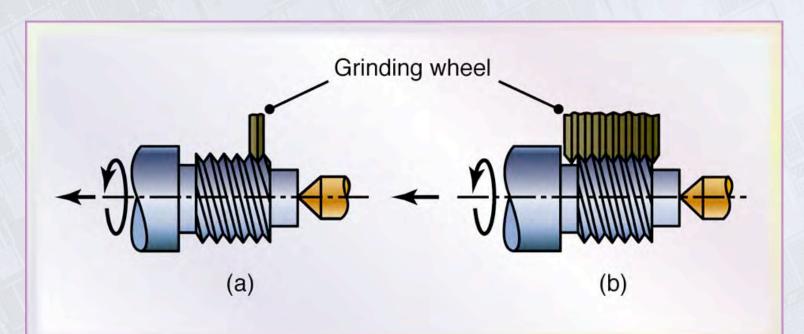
Thread grinding by (a) traverse and (b) plunge grinding.
